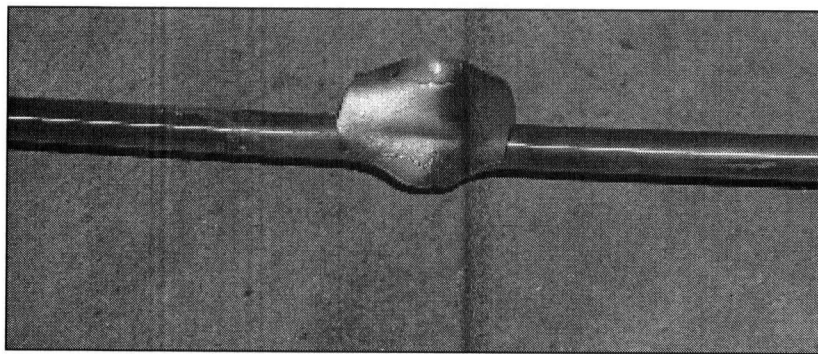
Tube failure due to corrosion in the first preheater (PH 1)
